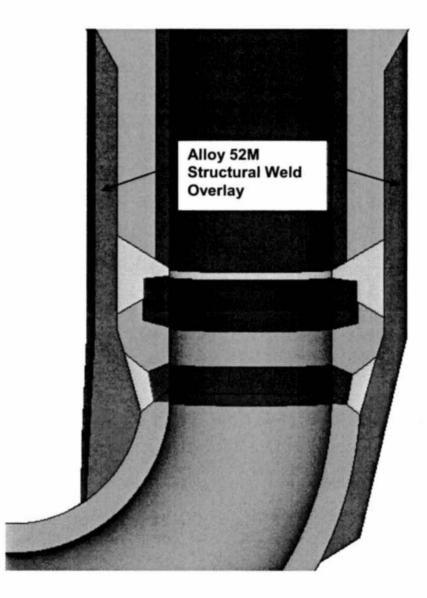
ID Repair welds extending 50% of the original DM Weld
